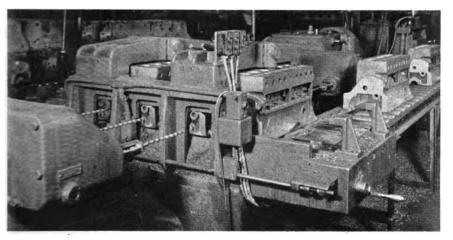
Two-way horizontal drilling machine with a progressive-type fixture for drilling the oil gallery holes. In the immediate background can be seen part of bank No. 5. Bank No. 4 is the other side of Bank No. 5. but at the time the picture was taken it contained no blocks.
